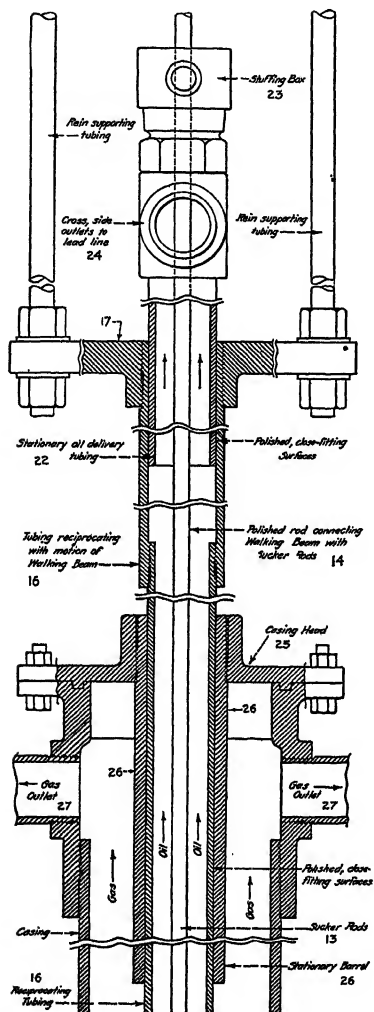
DETAIL OF ARRANGEMENTS AT CASING HEAD FOR OPERATING DOUBLE-ACTING OIL-WELL PLUNGER PUMP.
